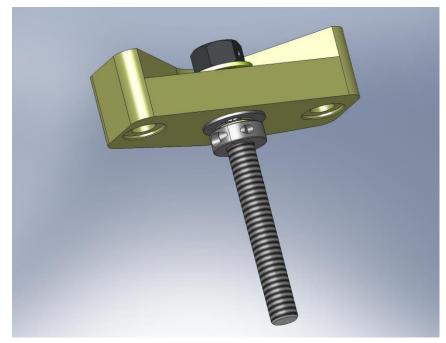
ACME Screw placed through the Conversion Bushing. The shaft collar locks the Screw to the Pull-Down Bar.
